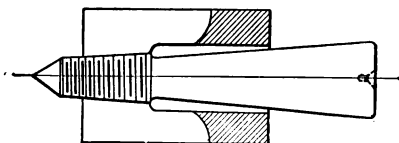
Spring Screw Die Mounted on Threaded Arbor for Grinding
